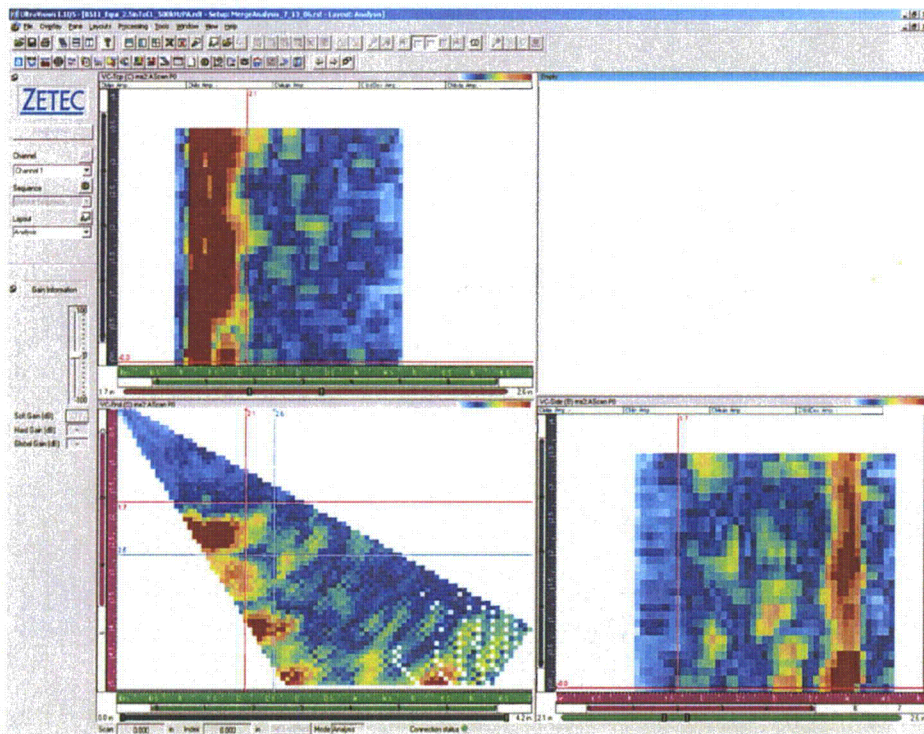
B511 as Inspected from the Equiaxed Side. This is blank material, i.e., no crack.
